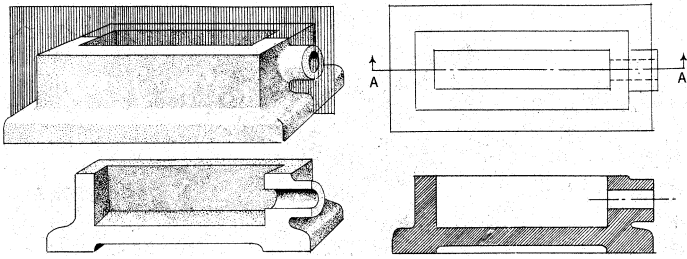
IMAGINARY CUTTING PLANE (LEFT) IS EMPLOYED FOR FULL-SECTIONED DRAWINGS (RIGHT), IN WHICH THE LOWER DRAWING SHOWS A SECTION THROUGH THE LINE A-A
